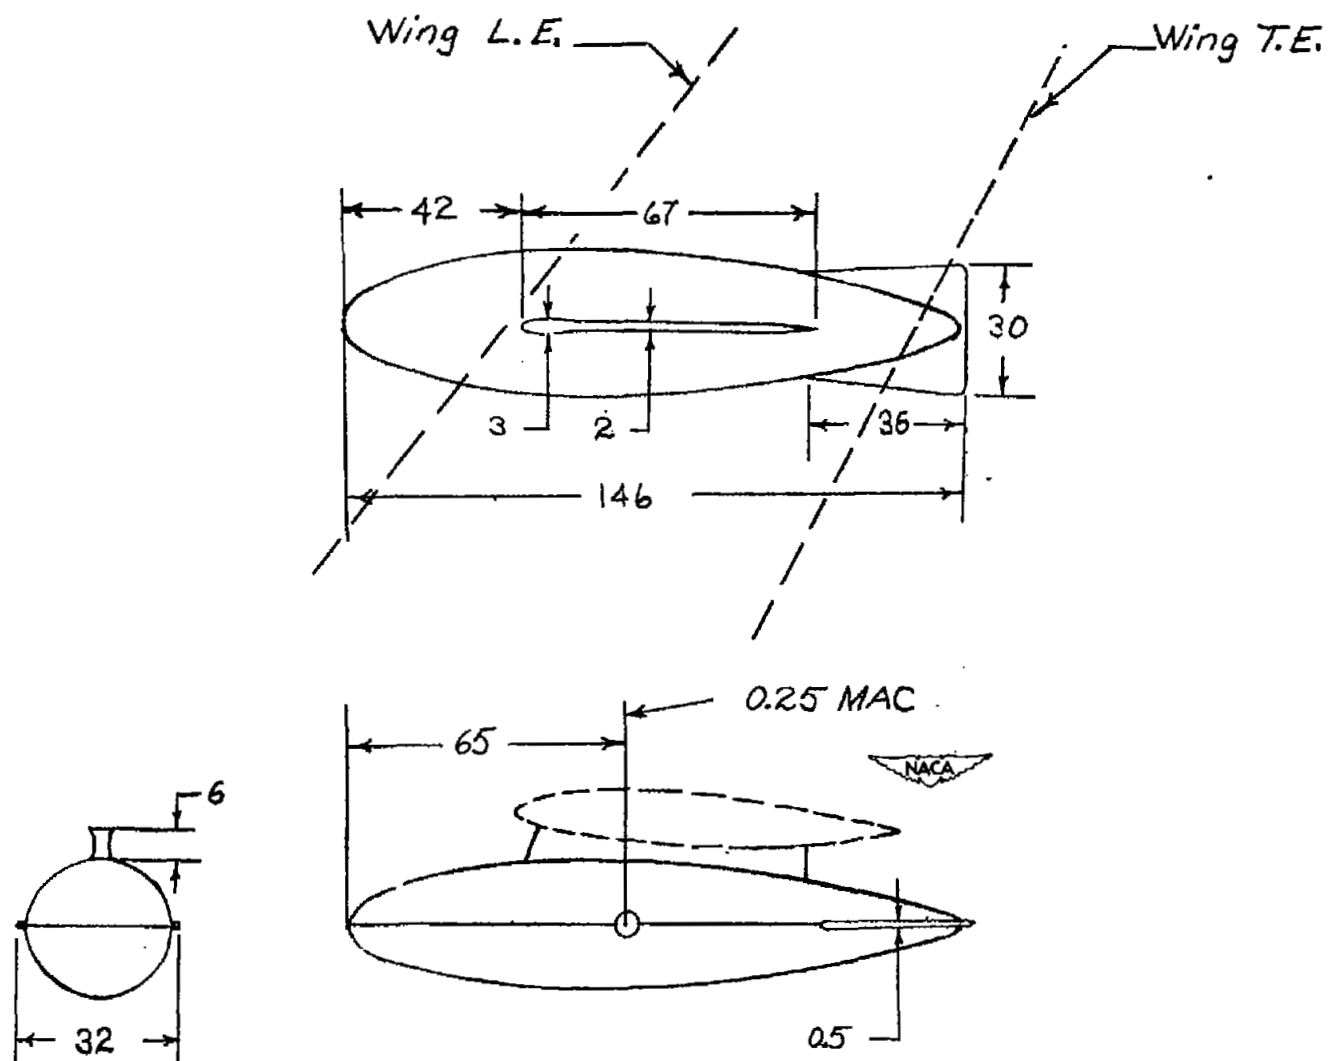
Dimensioned drawing of external store. All dimensions are in inches.
